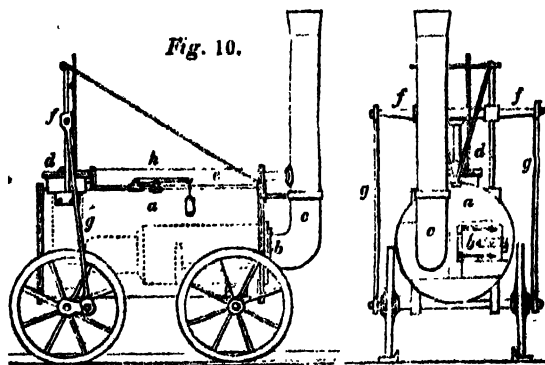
is a side and end elevation of this machine, the same letters in each referring to the same parts: *a* is the boiler, which is of a cylindrical form, with flat ends. The fire is contained in a large tube within, and on one side of the boiler. One end of this is seen at *b*, and the form is indicated by dotted lines in the side view. This tube extends nearly to the opposite end of the boiler, and then, being diminished in size, it is turned round and brought out to the chimney at *c*. The fire-tube is completely surrounded by the water, by which arrangement steam is generated with great rapidity and of a high degree of elasticity. The steam cylinder is
